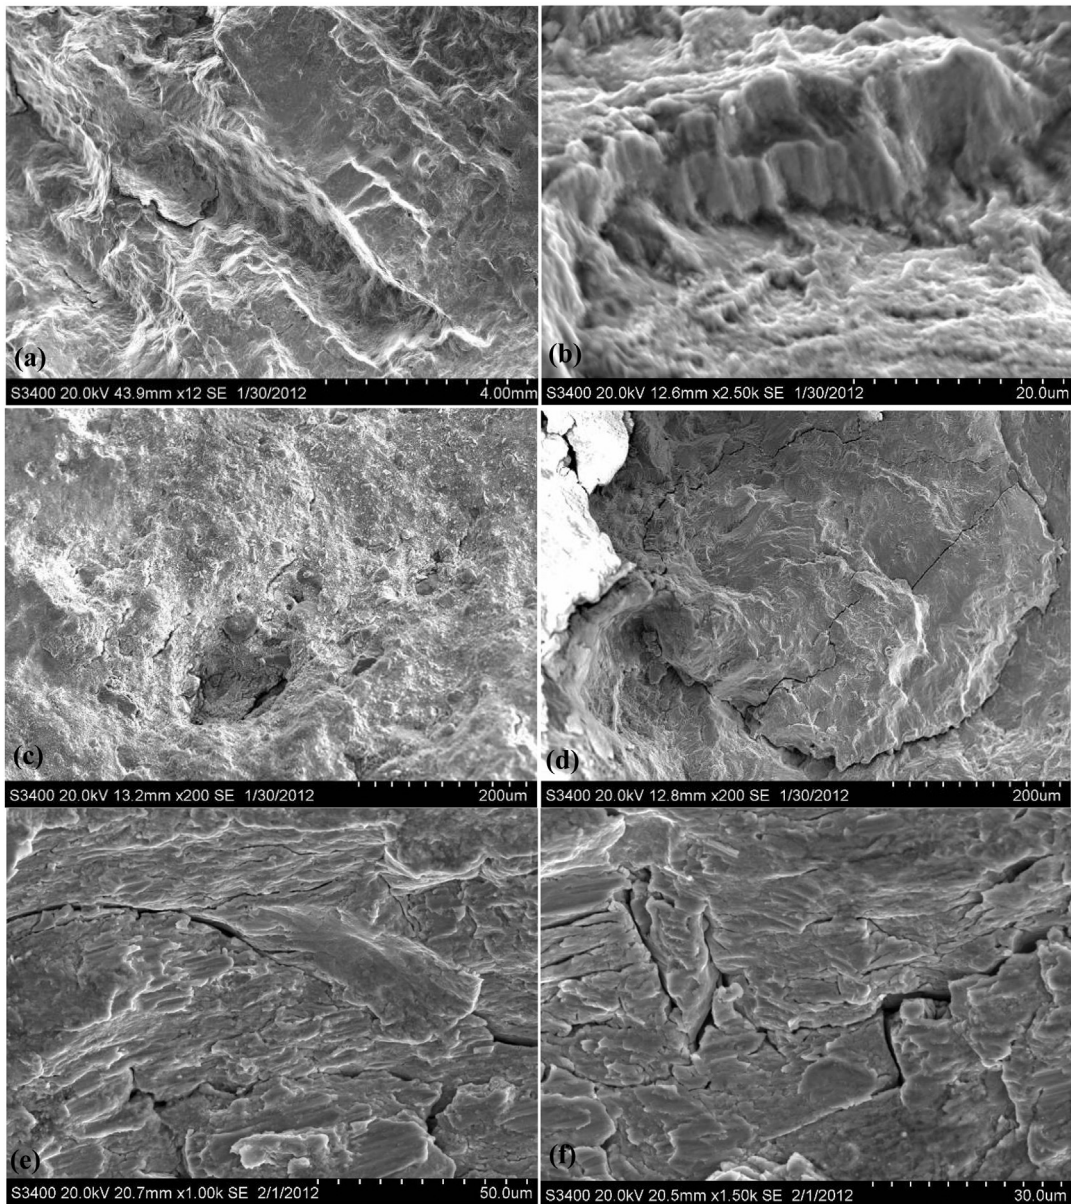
The SEM images of the fracture (a) the torn edge, (b) the end of torn edge, (c) the shallow dimple, (d) the secondary crack around the shallow dimple, (e) the river pattern and (f) the fatigue crack.
